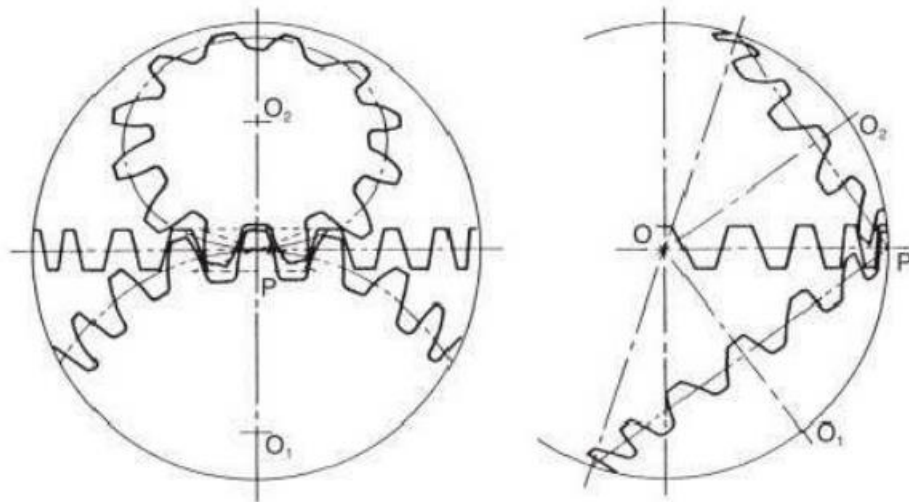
Meshing Bevel Gear Pair with Conjugate Crown Gear
